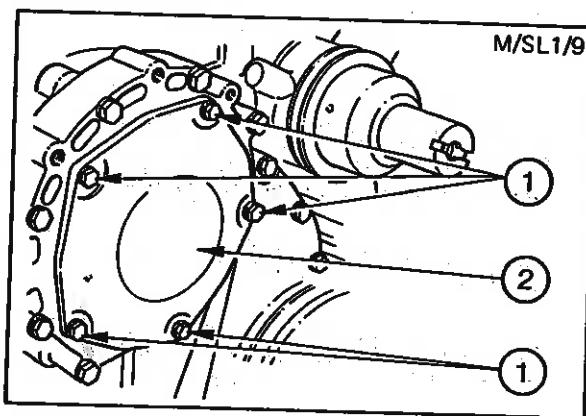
Removing Injection Pump Timing Aperture Cover Plate
